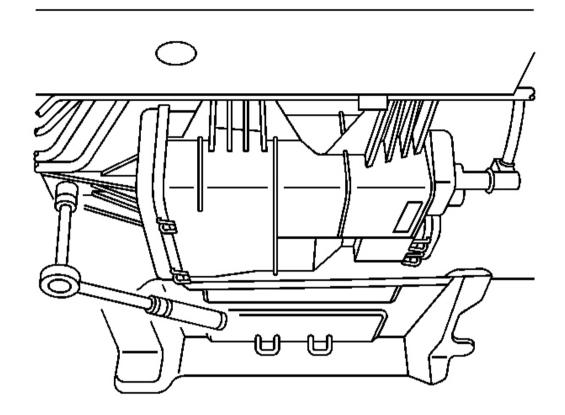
View Of EVAP Canister-To-Body Underbody Fasteners Courtesy of GENERAL MOTORS CORP.
